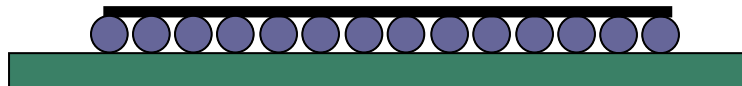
Simplified configuration of the solder joints in BGA assembly.
